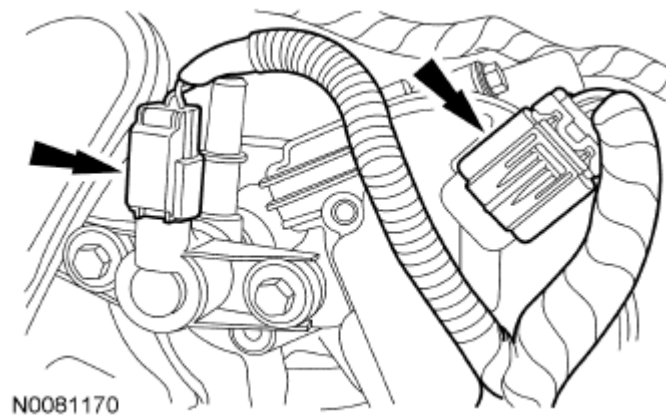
Locating Electronic Throttle Control And Evaporative Emission Canister Purge Valve Electrical Connectors
